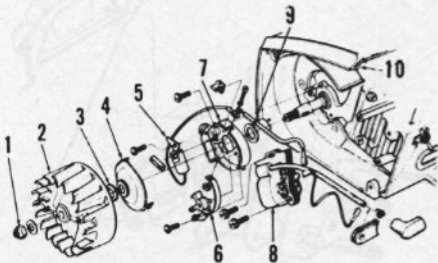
Exploded view of ignition assembly. Felt seal (3) is cemented to breaker box cover (4).
